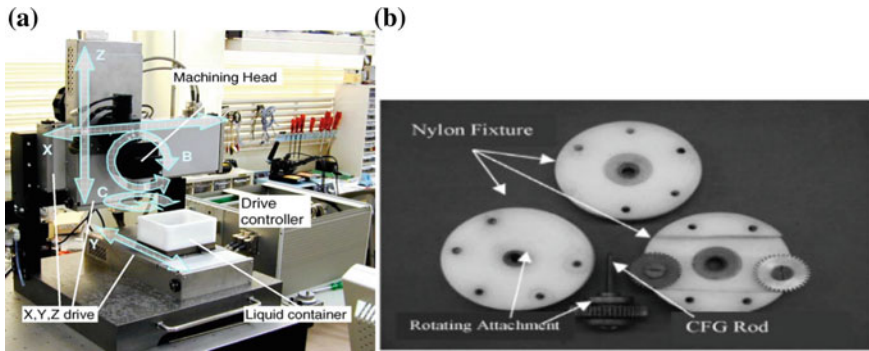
a Machine tool system, b CFG rod and nylon fixture arrangement [6]
